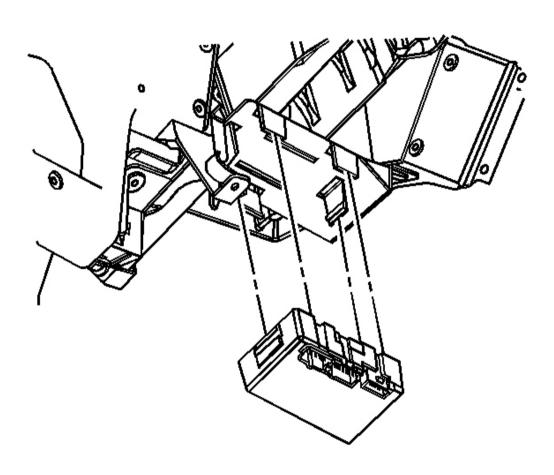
Transfer Case Shift Control Module Courtesy of GENERAL MOTORS CORP.
